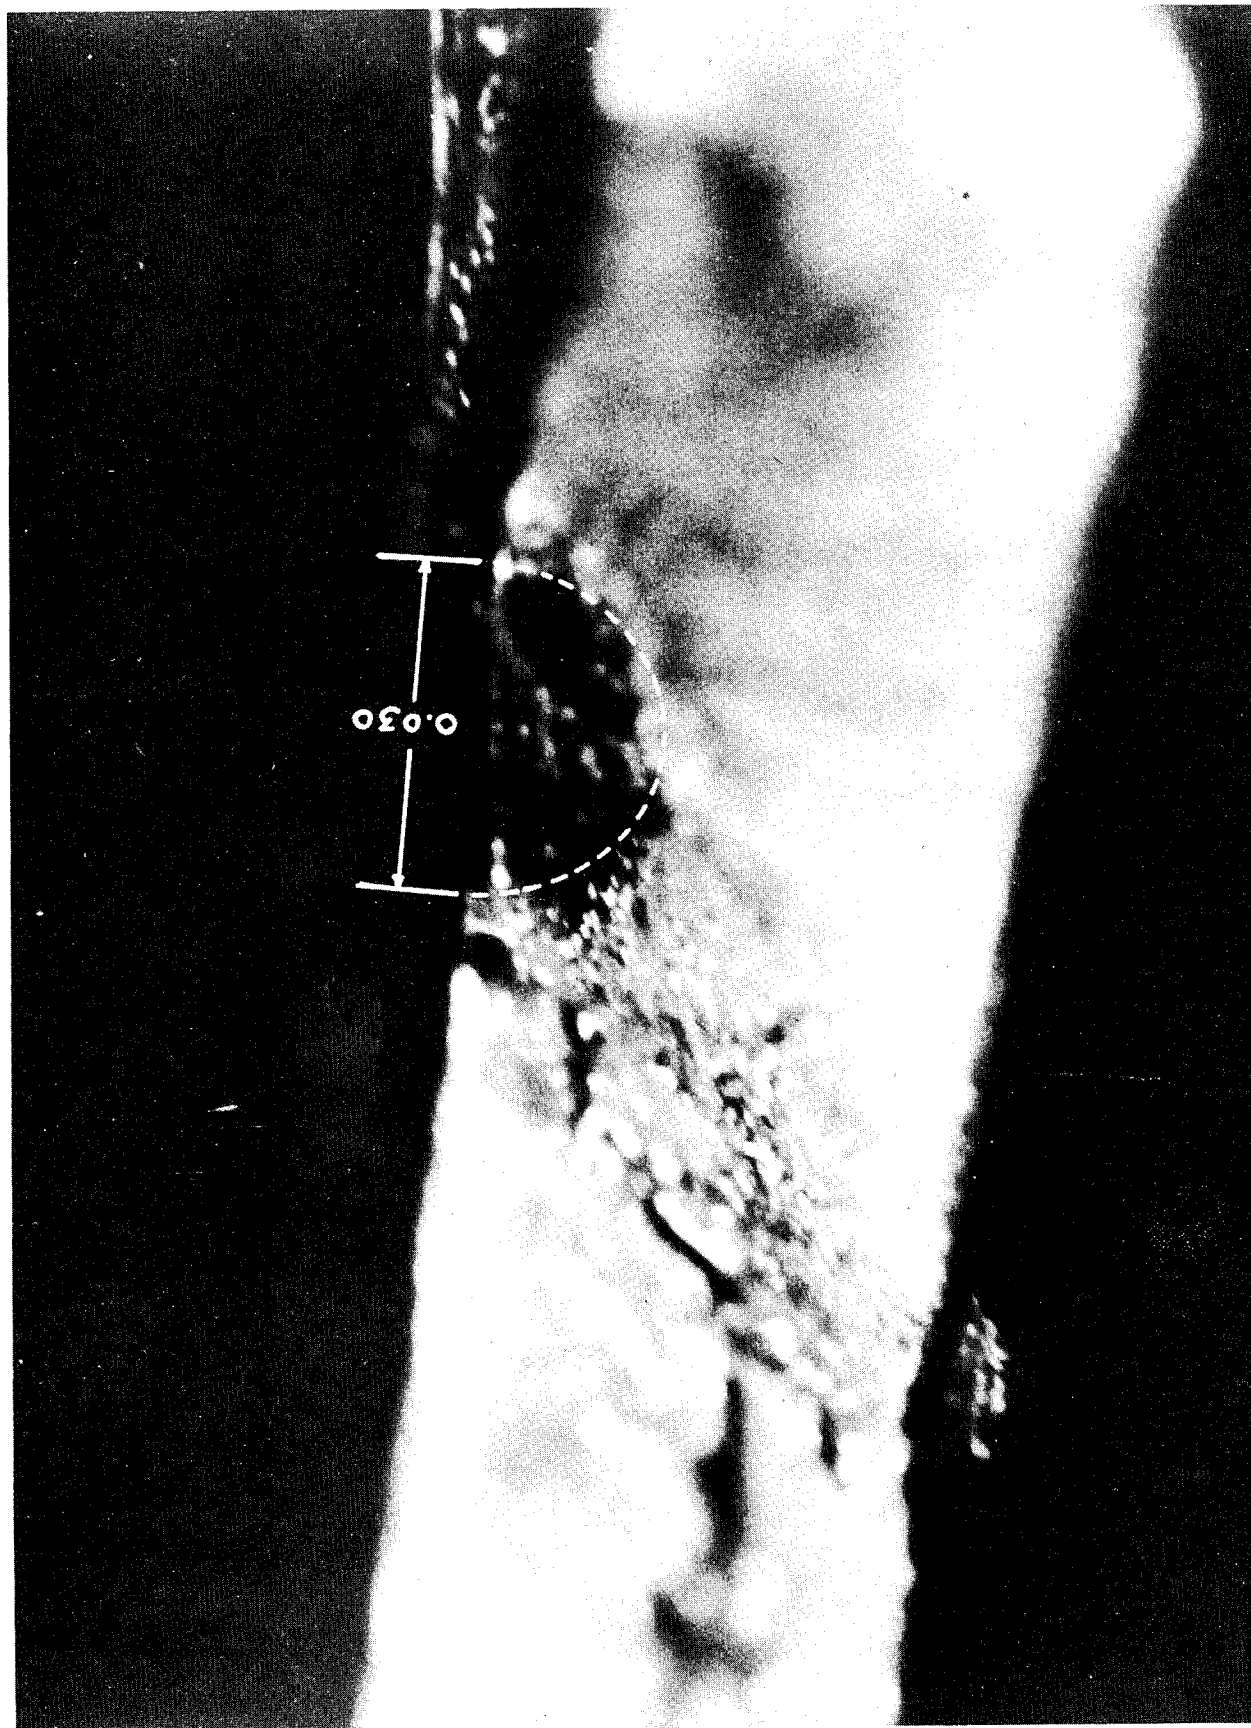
Fracture Origin in Budd Company Rocket Motor Case.
